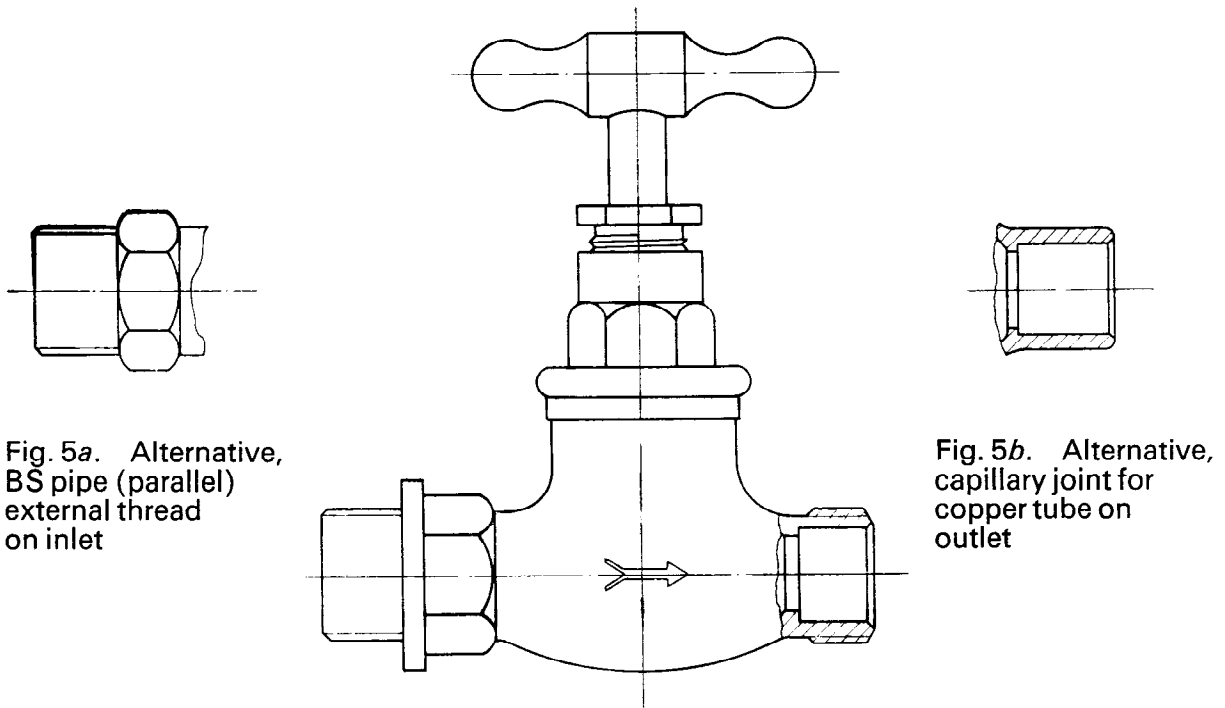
Stopvalve with BS pipe (parallel) external thread on inlet, compression joint for copper tube on outlet
